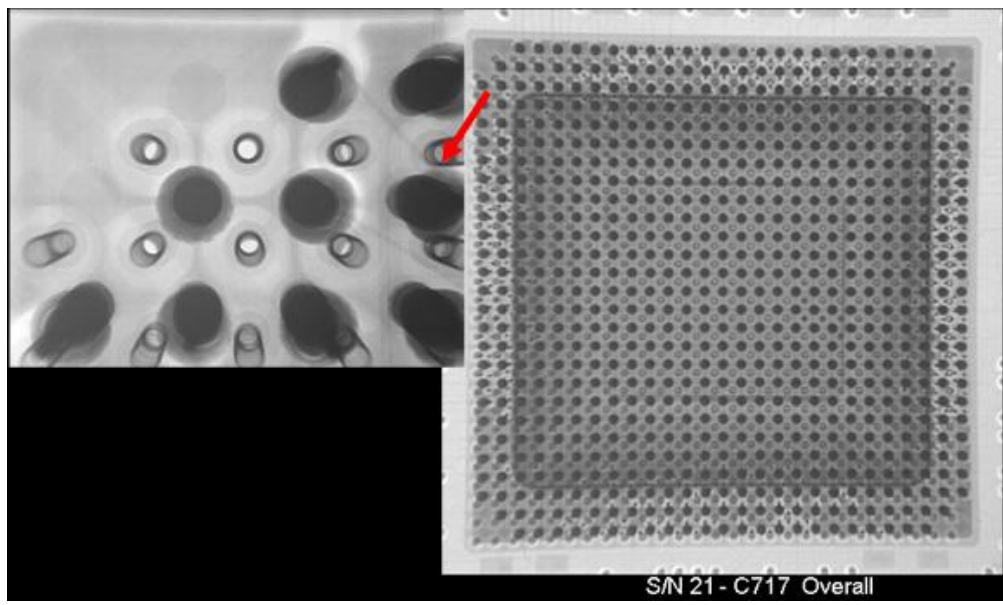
X-ray photographs of CGA 717 I/O assembly with SMD pad design after thermal cycling.
